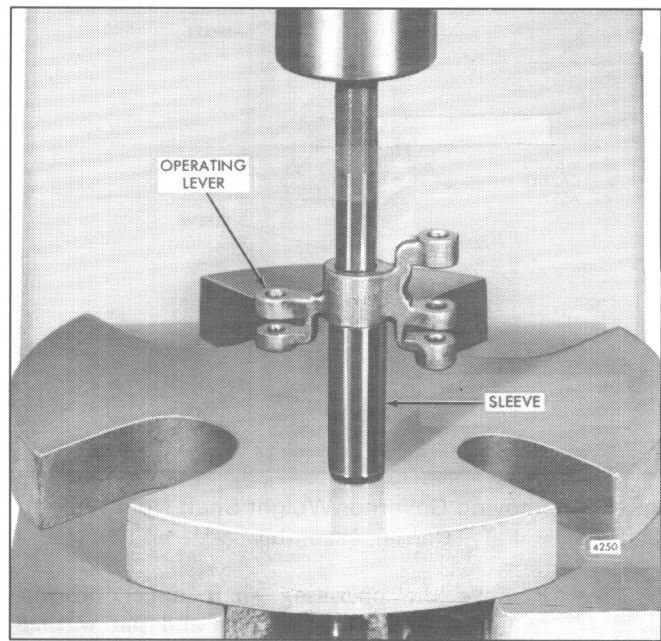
Removing Operating Lever Needle Bearings using Tool J 8985
